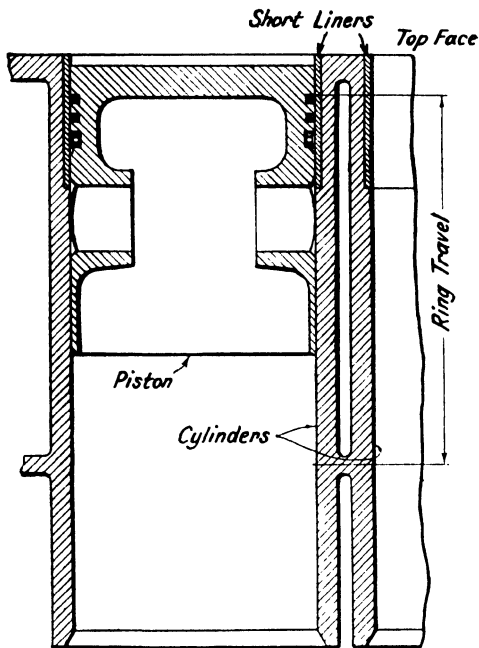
THE UPPER PART OF EACH CYLINDER OF THE STANDARD TWELVE ENGINE IS COUNTER-BORED TO RECEIVE A SHORT "BRIVADIUM" LINER
